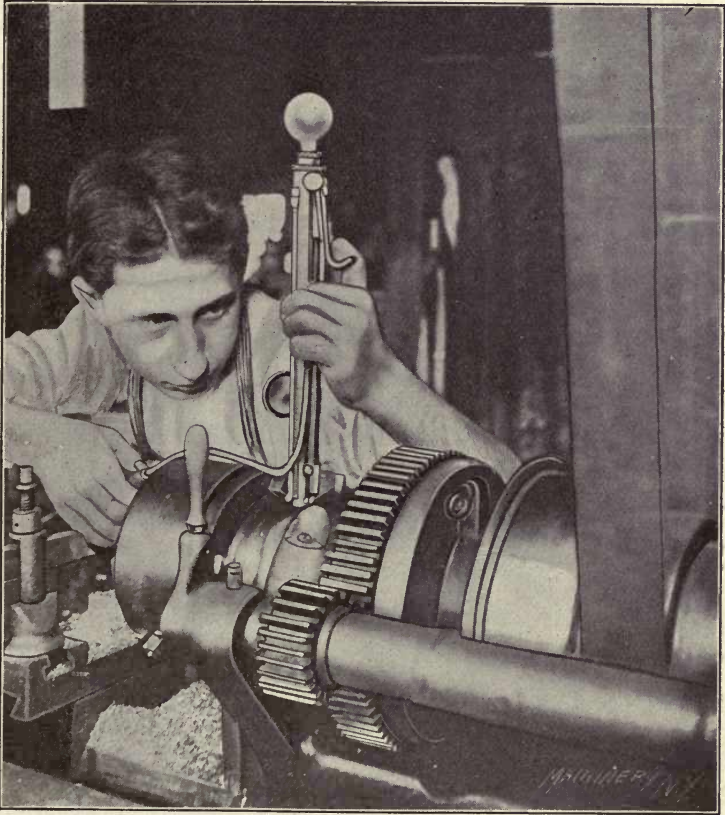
Shaft and Box of a Lathe being Tested to determine the Relative Hardness
